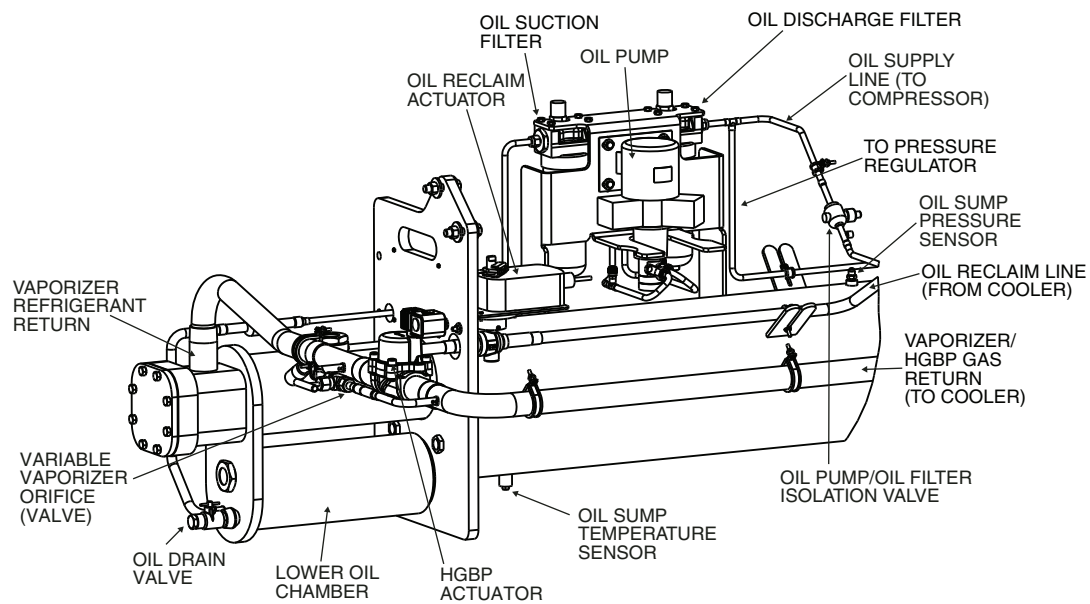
Oil Reclaim Components (Unit with R Compressor Shown)
